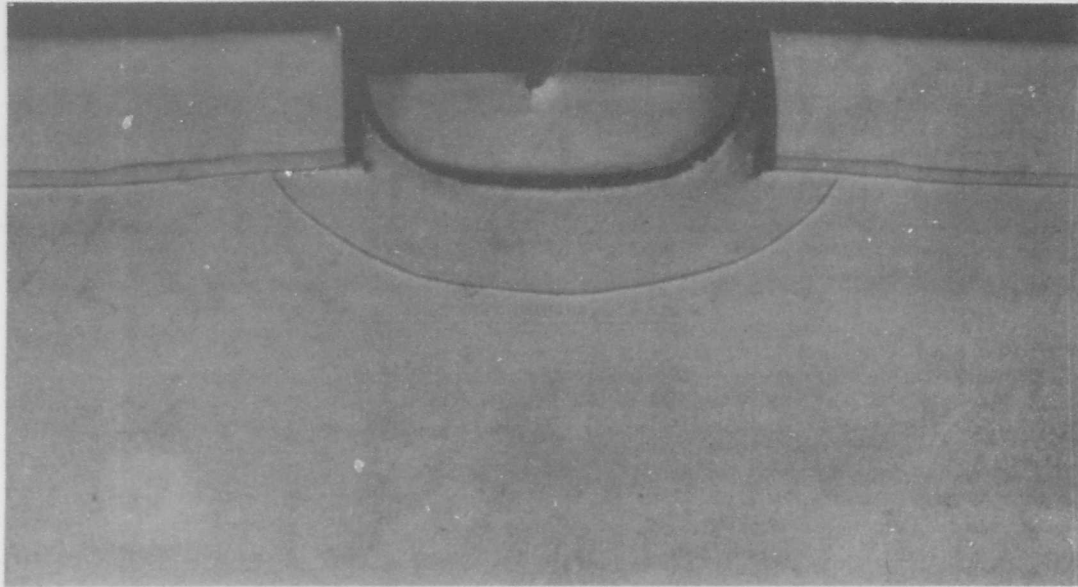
SPECIFICATION CENTER CUTOUT (BOTTOM VIEW)
